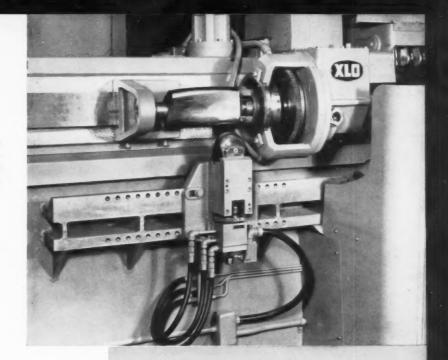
Close-up view of a profile-milling machine for cutting the airfoil surfaces of compressor blades. Steadyrest rollers resist cutting pressure to reduce deflection.
